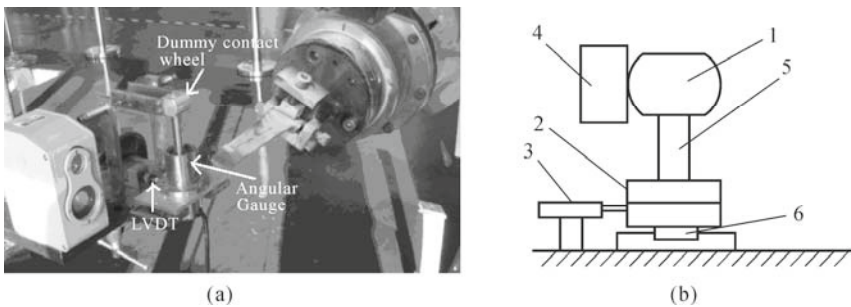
Fine tuning device. (a) System layout; (b) Side view
